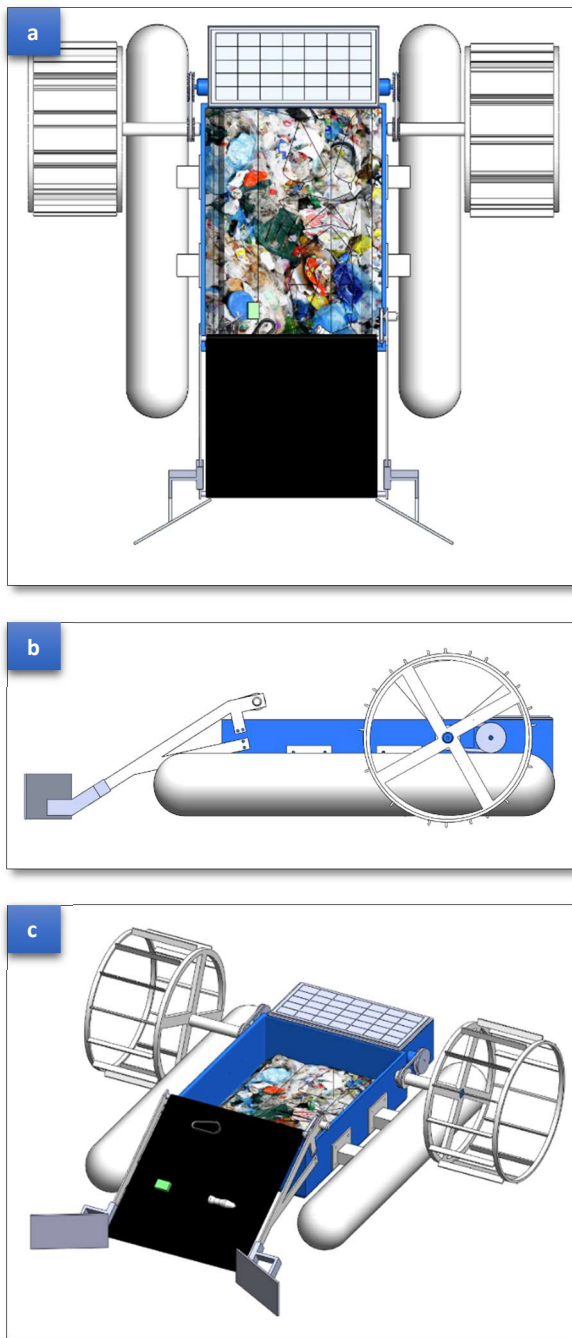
Final design (a) Top View, (b) Front View and (c) Isometric View
